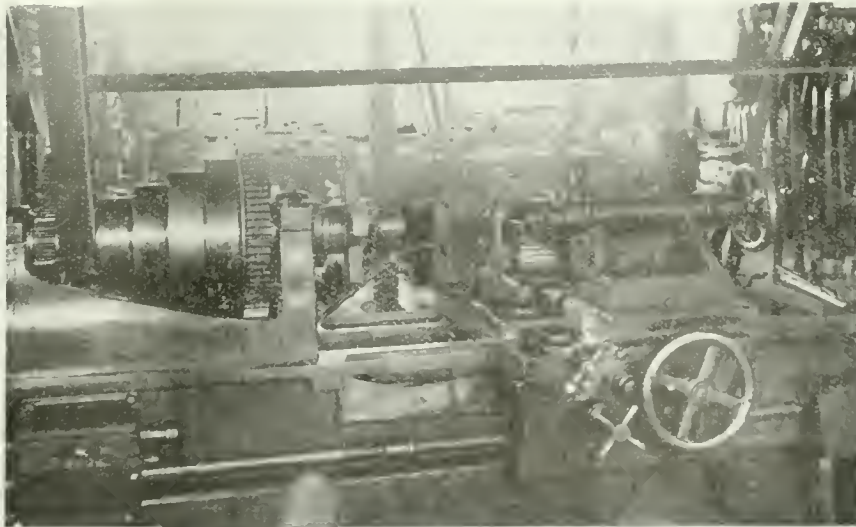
LATHE IN WHICH SHELL BODIES ARE ROUGH TURNED
